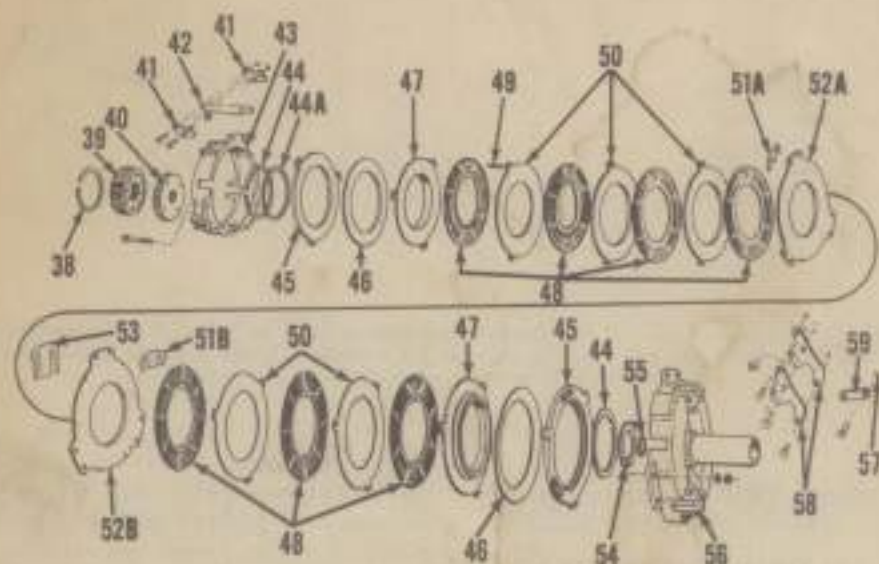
Exploded view of D-17 "Power-Director" clutch assembly, D-14 and D-15 models are similar except spacer (44A) is omitted.
